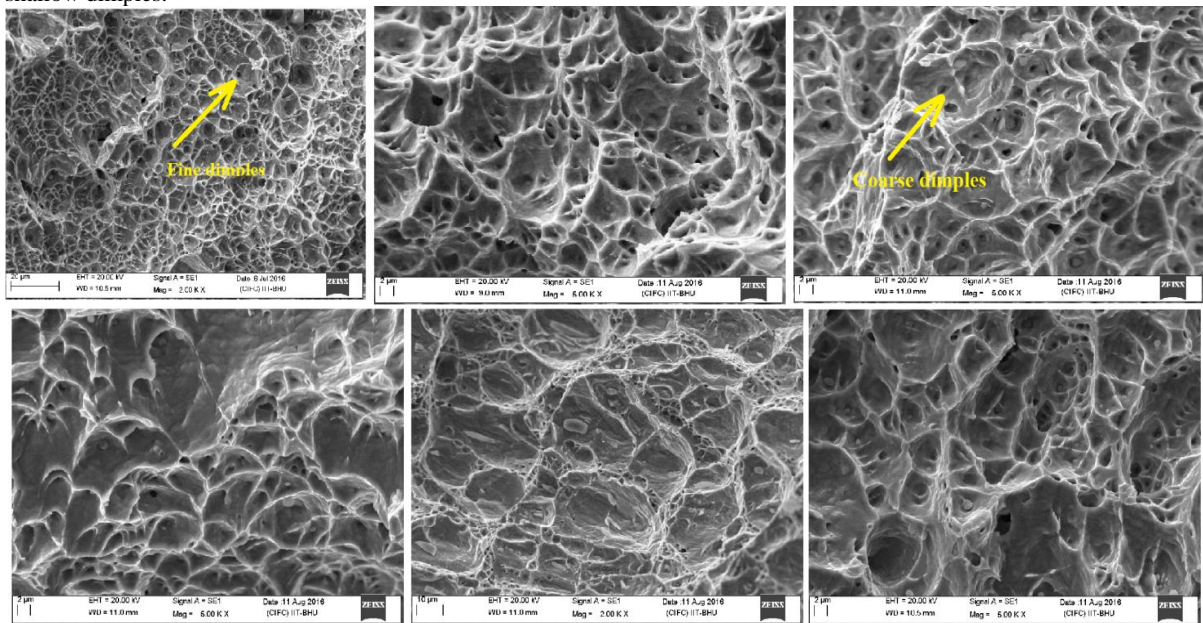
Fractograph morphology (SEM) of tensile test specimens
